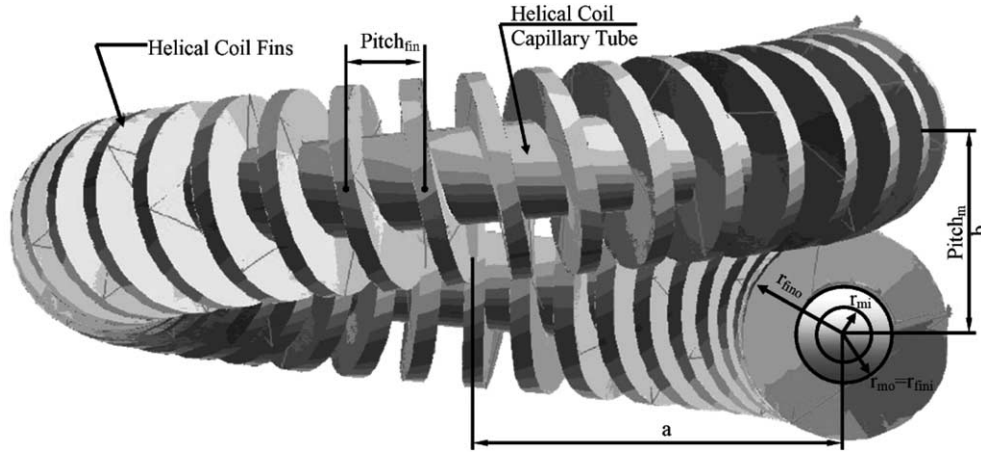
Elevation view of the helical coil capillary tube and fins.
